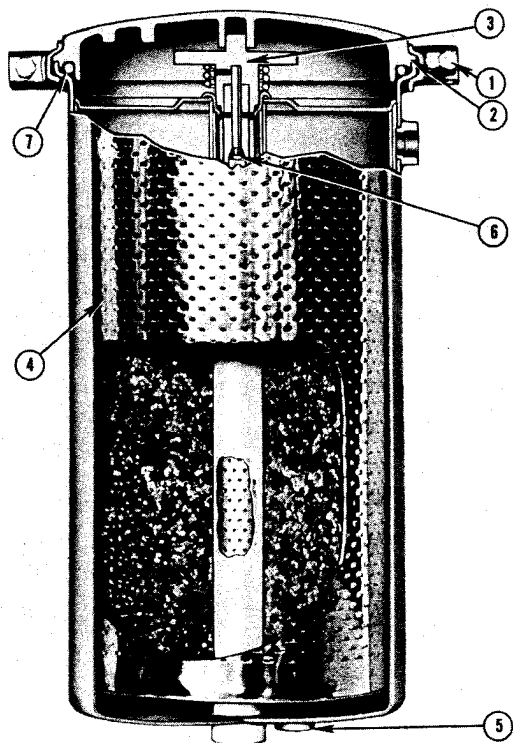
, (V41908). Lubricating oil by-pass filter
